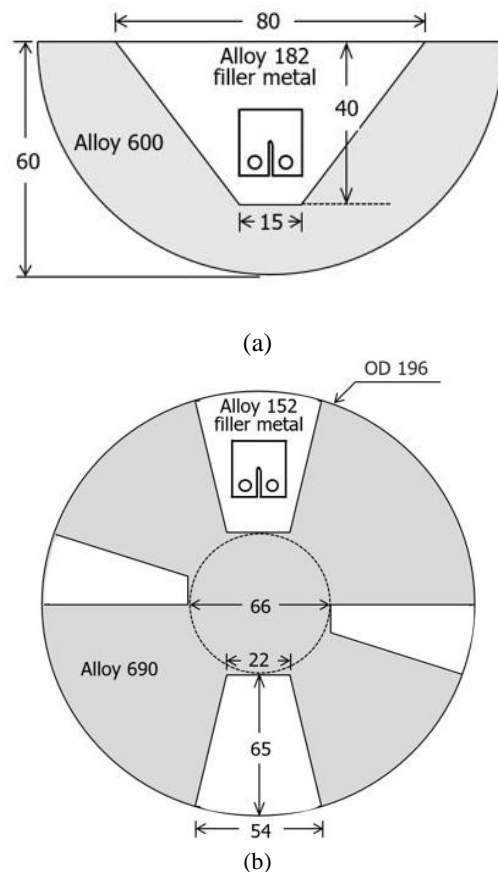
The geometries of weldment and the region where a CT specimen was taken from (a) the Alloy/182 weld and (b) the Alloy 690/152 weld, respectively
